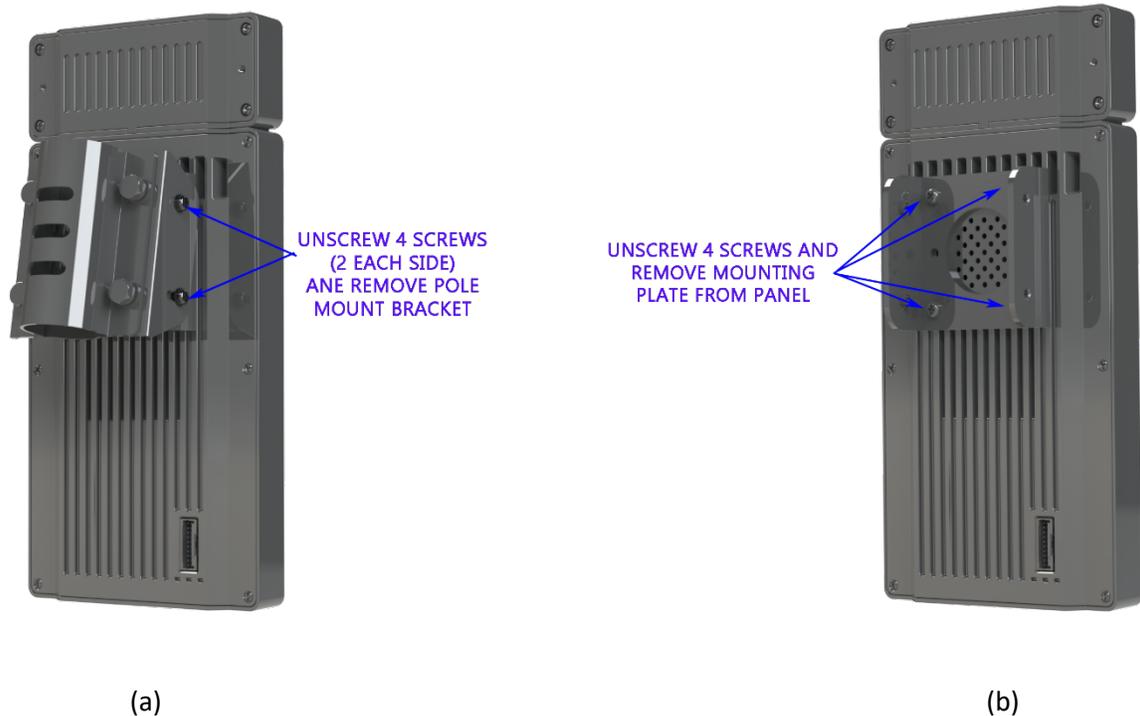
(a) Pole Mount Bracket (b) Mounting Plate
